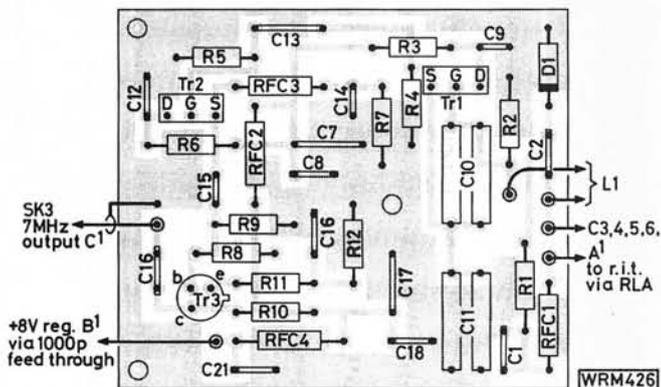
Board 10 (v.f.o.) component layout and p.c.b. track pattern, shown full size
